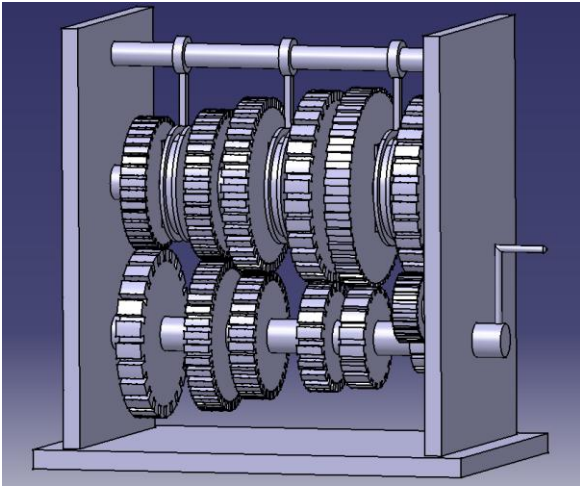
CATIA Model of Six speed constant mesh Gearbox
